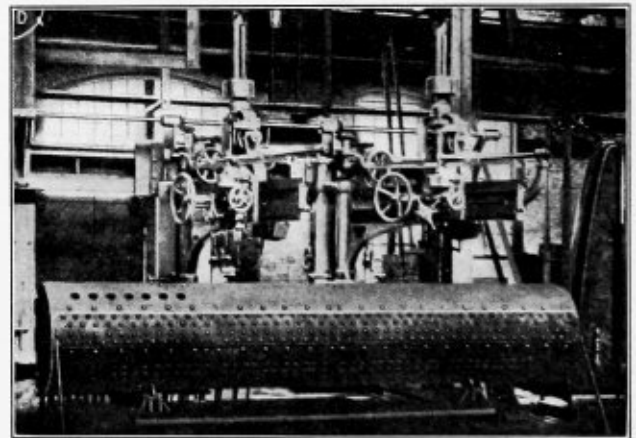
Double Arm Radial Drill Reaming Rivet and Tube Holes
